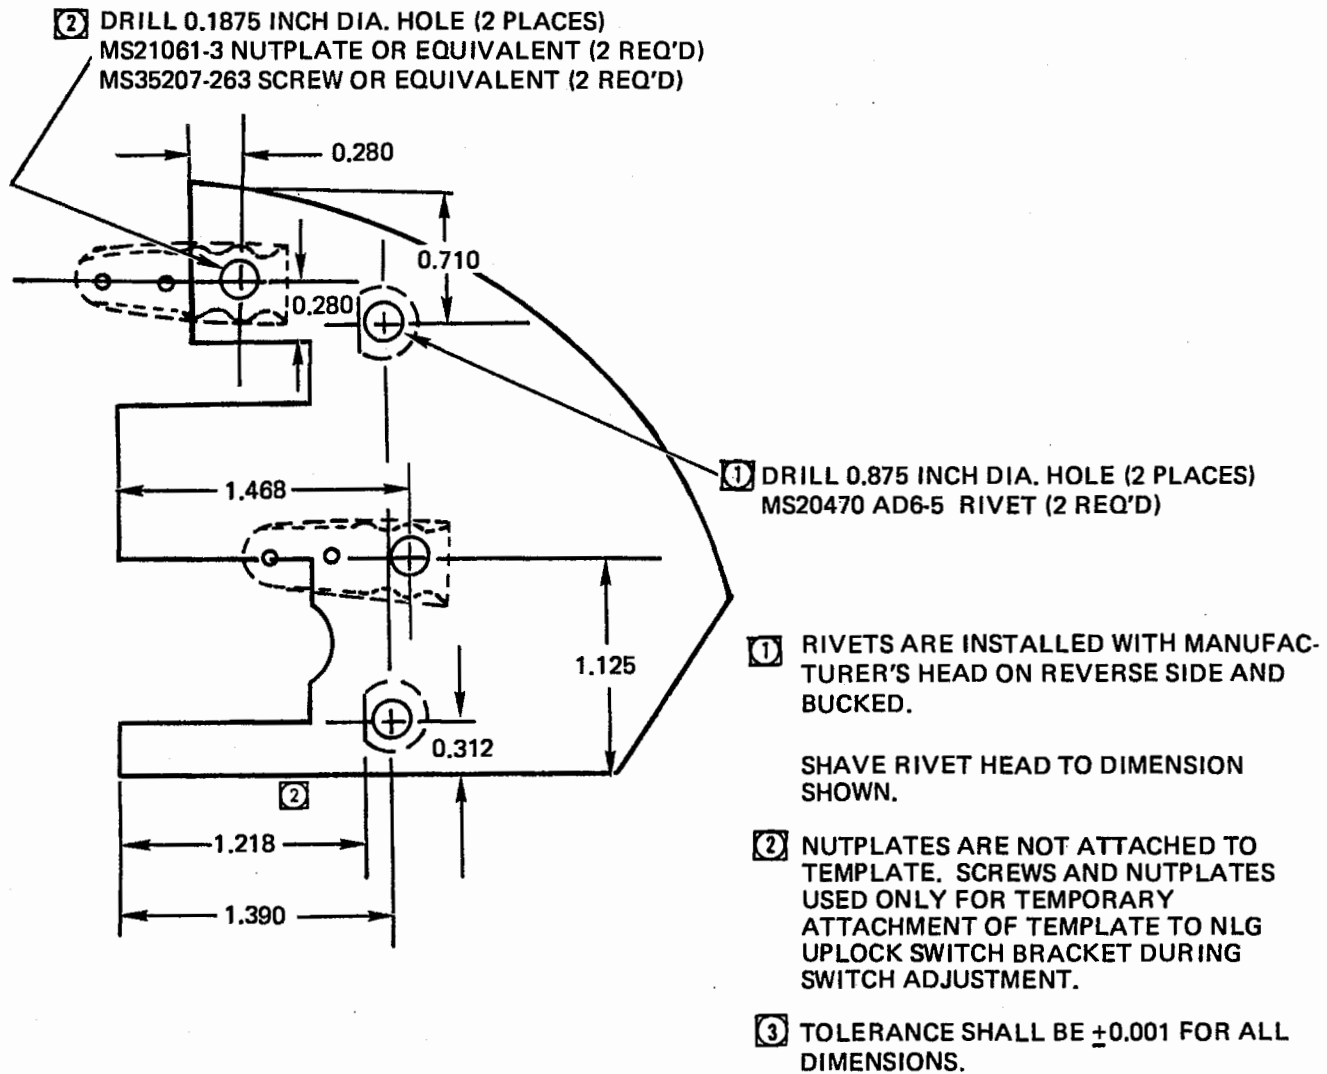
Nose Landing Gear Uplock Switch Template Manufacture (Sheet 2 of 2)
